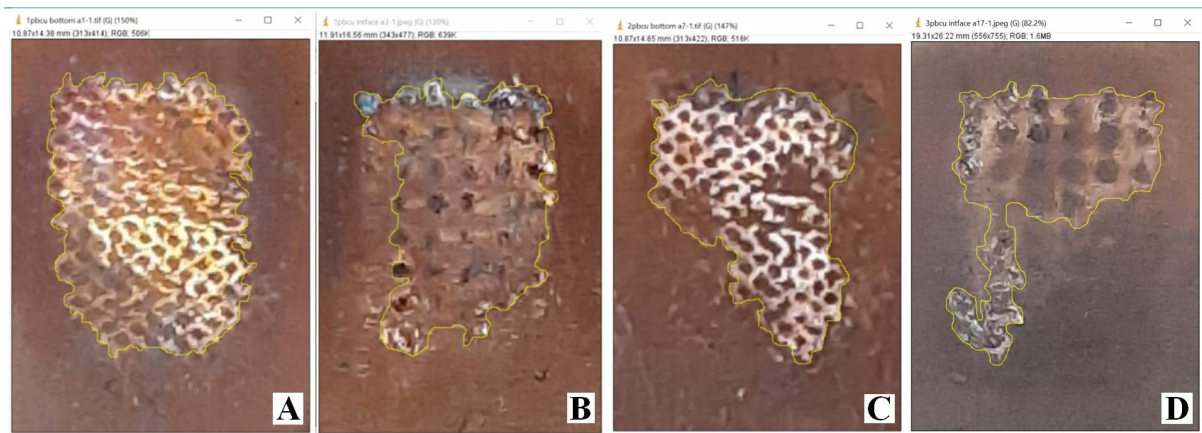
Impressions created by the anvil knurling pattern: (A) and (C) are the bottom side of the lower sheet (Cu); (B) and (D) are the corresponding impressions at the interface of the weld coupon
